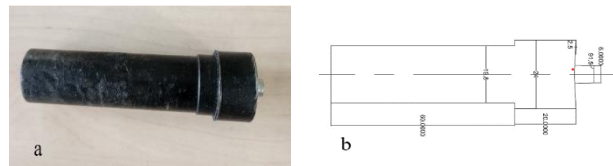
Friction Stir Welding Tool (a) the fabricated EN31 tool (b) CAD schematic.
